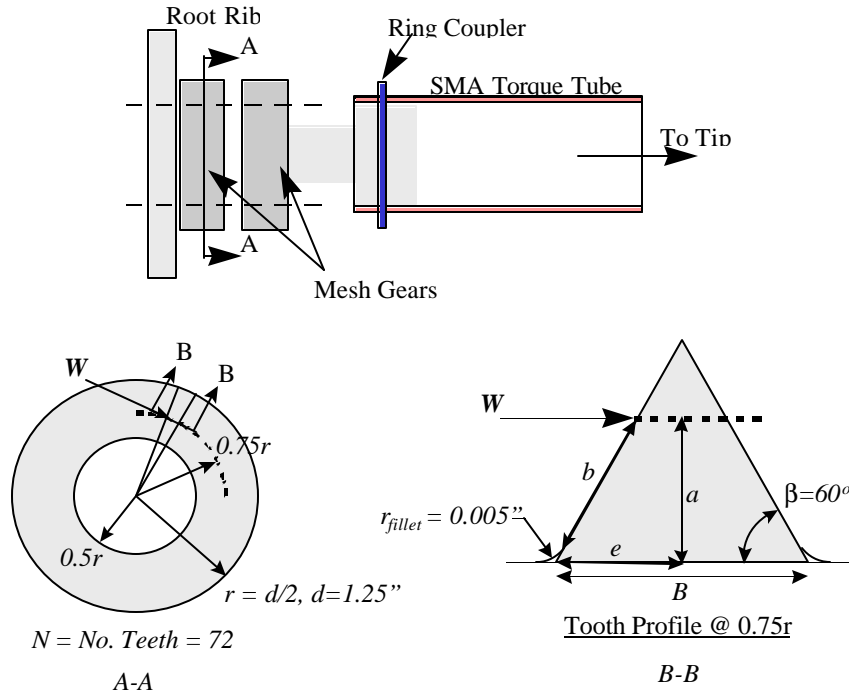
Mesh Gear and SMA Torque Tube Assembly
